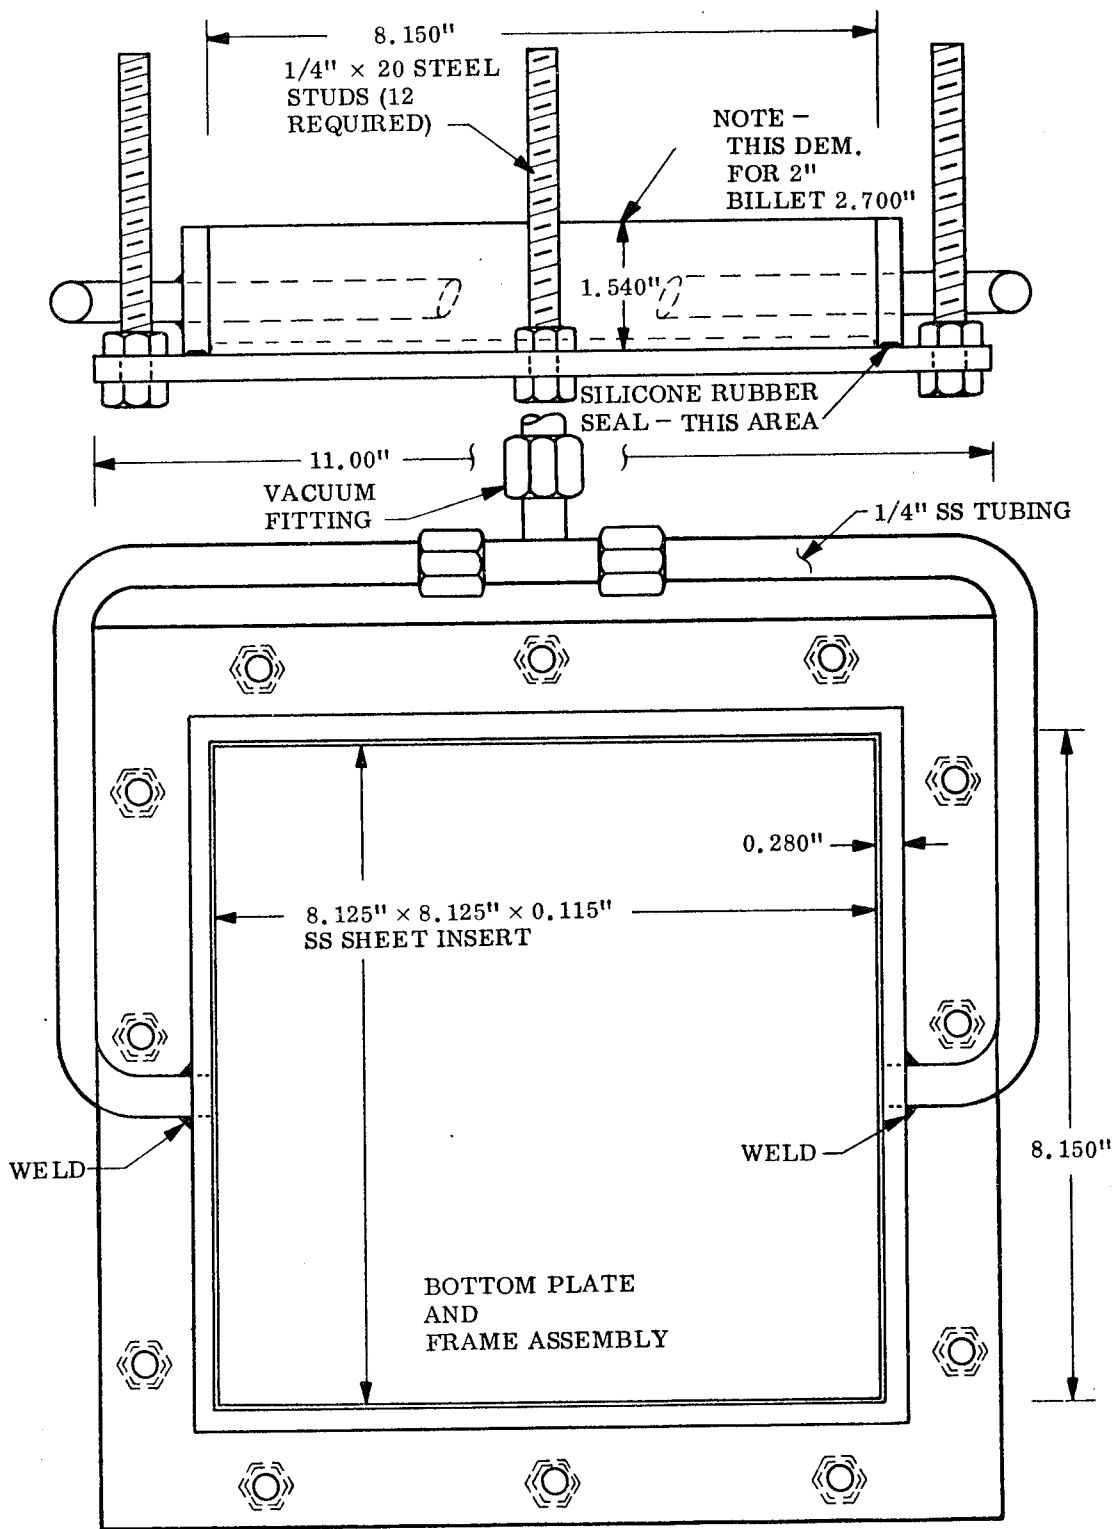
1-inch PBI-Carbon Composite Billet Cure Mold (Stainless Steel)
